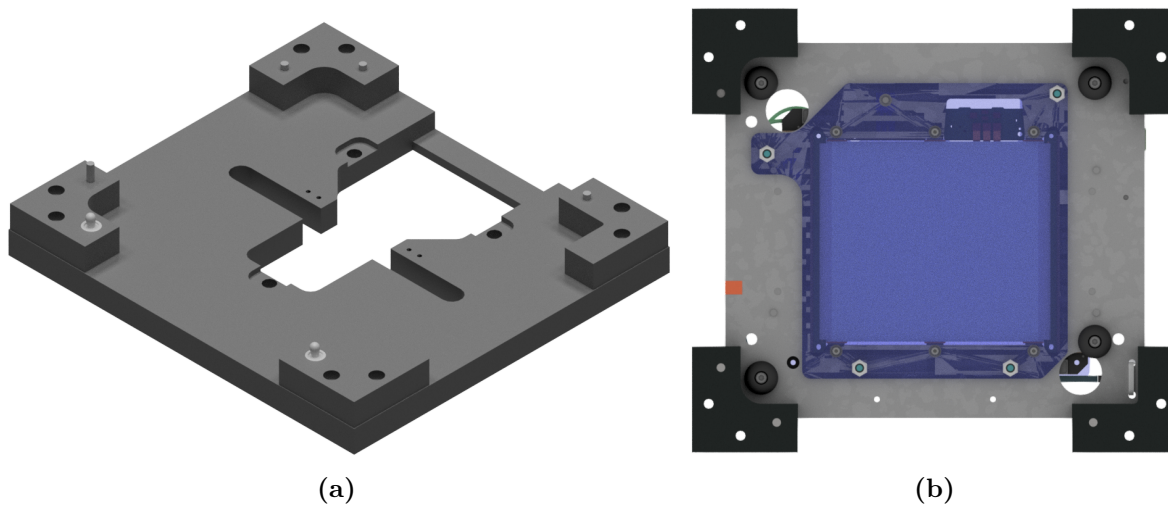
(a) 3D rendering of the fixture design used to mount module carriers in the OT Module Test Station. It consists of a baseplate and four corner plates. (b) The four corner plates support the module carrier at the carrier edges. The base plate is not shown in this rendering.
